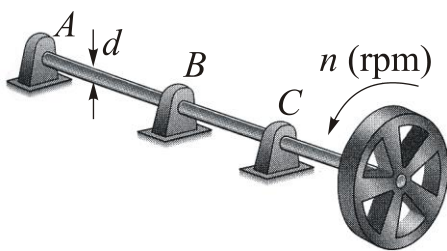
Rotating flywheel creates torsional deformation of the shaft if the bearing at A suddenly freezes
